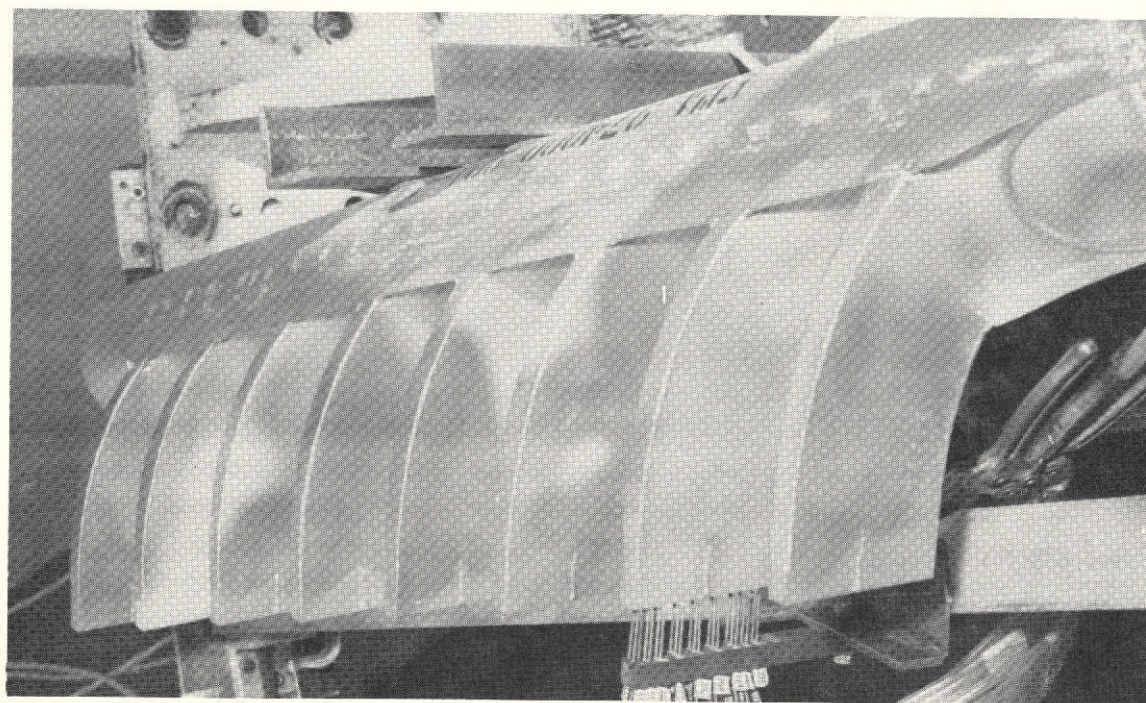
WING-DUCT-LOBE NOZZLE ASSEMBLY DNA-6 DESIGN DETAILS
